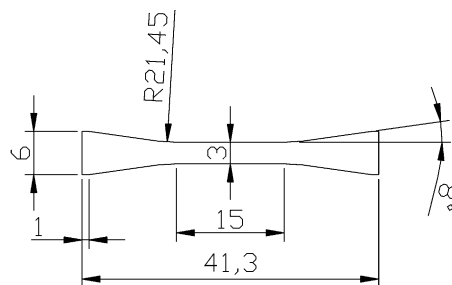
Edge-loaded small tensile specimen (dimension: mm).
